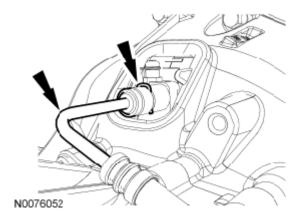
Locating Clutch Hydraulic Line And Clip Courtesy of FORD MOTOR CO.
